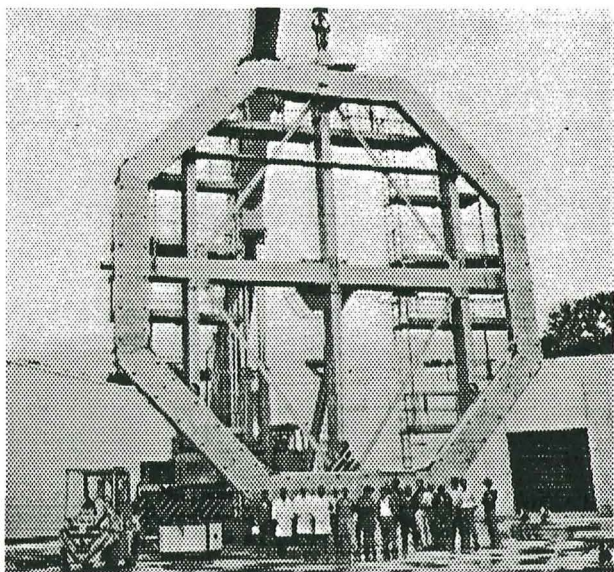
A six-turn package, part of the aluminum coil for the L3 magnet.
